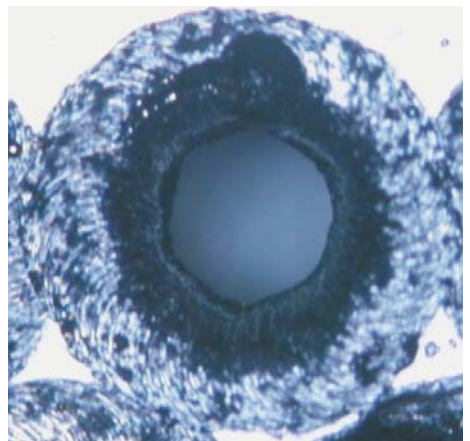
Welded nozzle in a glass-drawing pan made of platinum (SEM top view)
